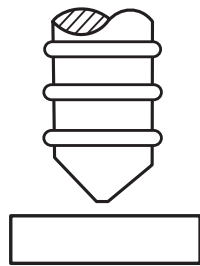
(Continued)—Full Section Tension Test Specimens
